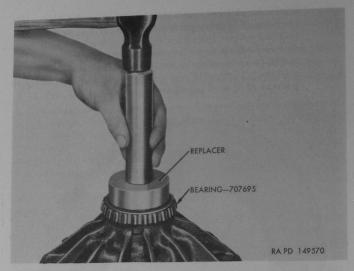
Installing differential side bearing with replacer 41-R-2381-220.
